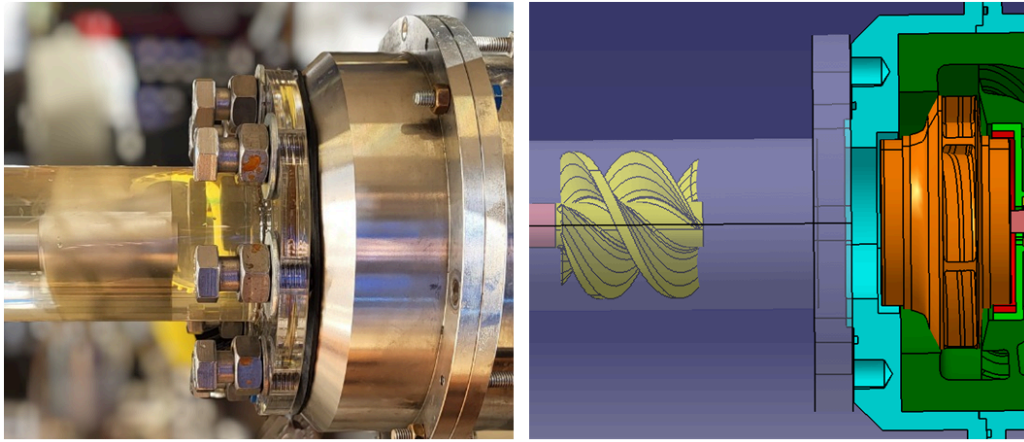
Photography and schematic of the test section including inducer and impeller in the test bench
